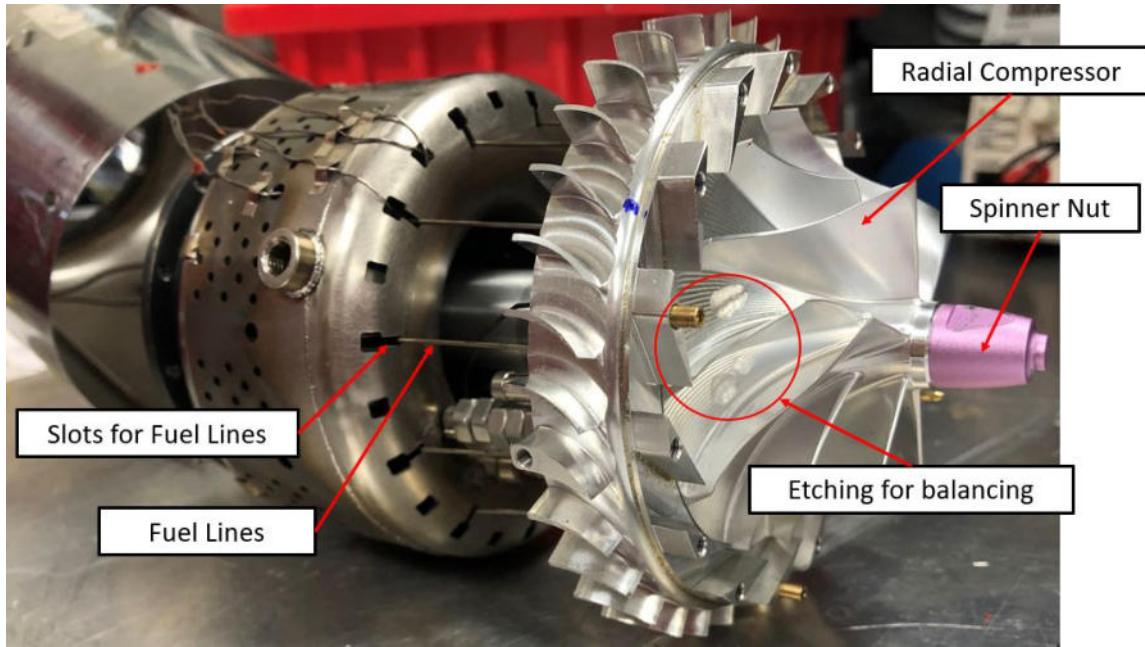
JetCat P160-RXi-B reassembly with instrumented compact combustor
